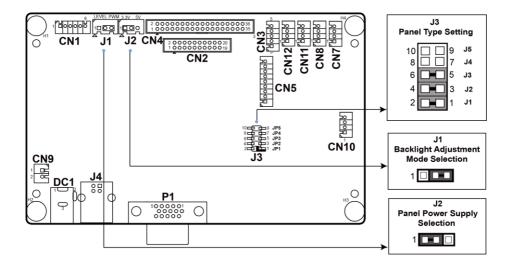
MP-4815 A/D Board Component Location (Top View)
